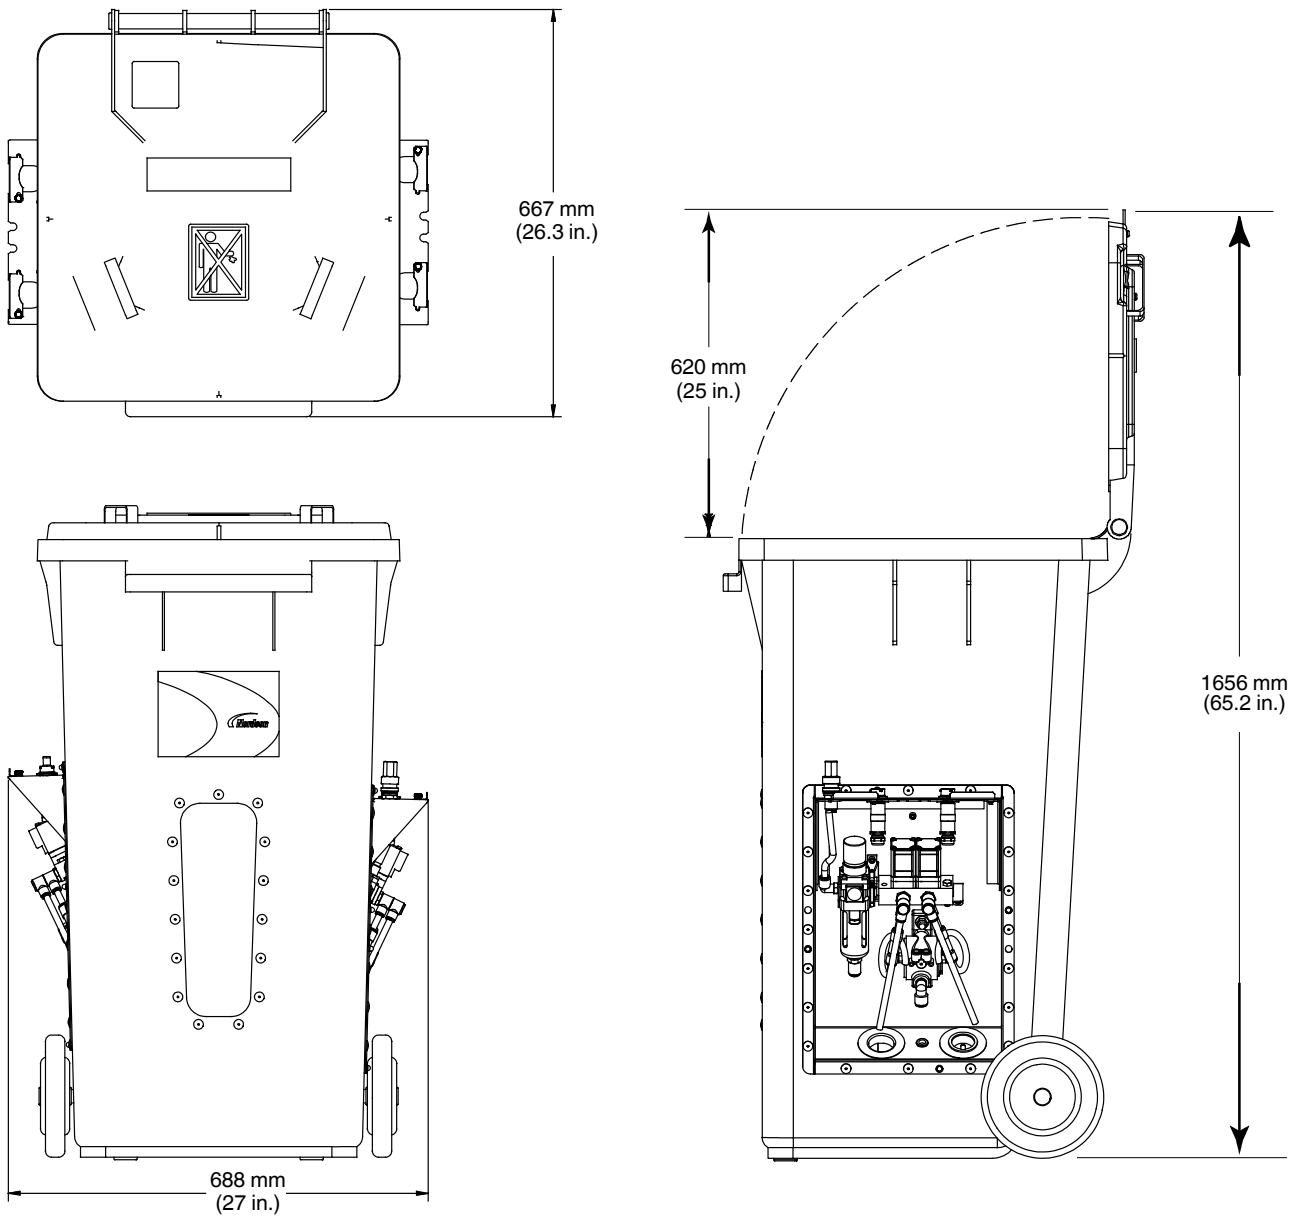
Multi-feed adhesive storage bin dimensions and clearances
